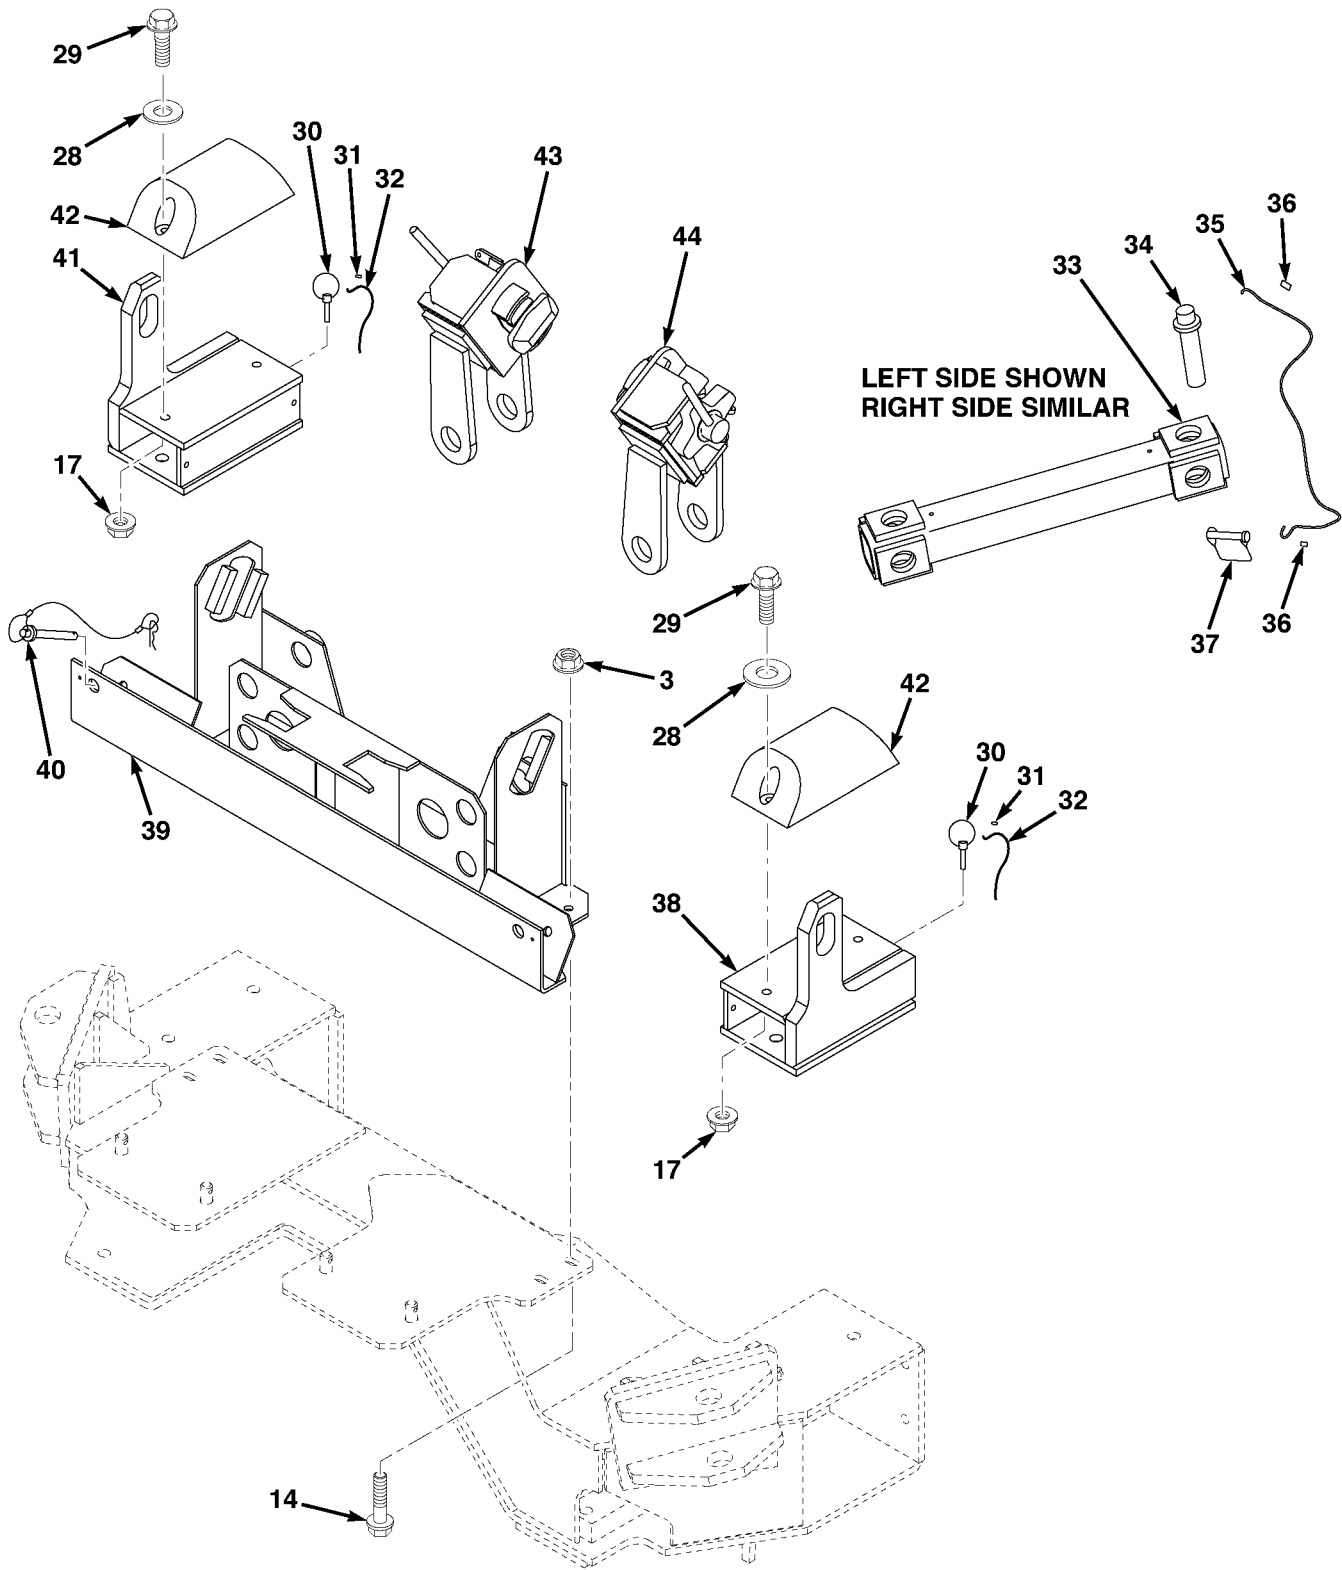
FRONT CONTAINER SUPPORT (SHEET 2 OF 2)
